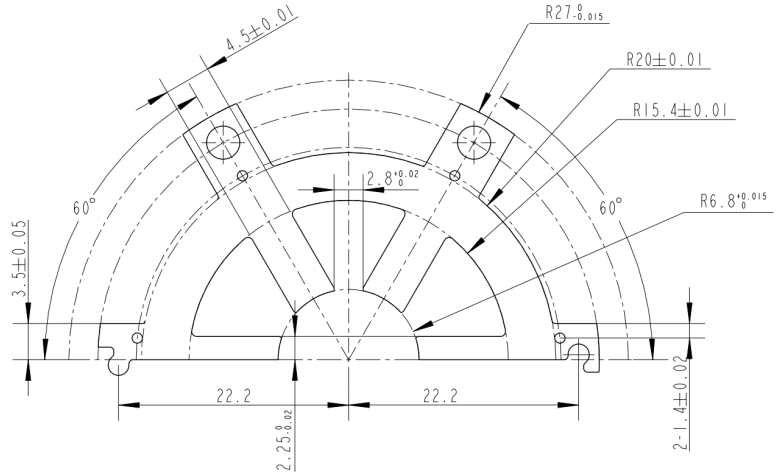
Stator and rotor scheme of a 2P6S motor.
